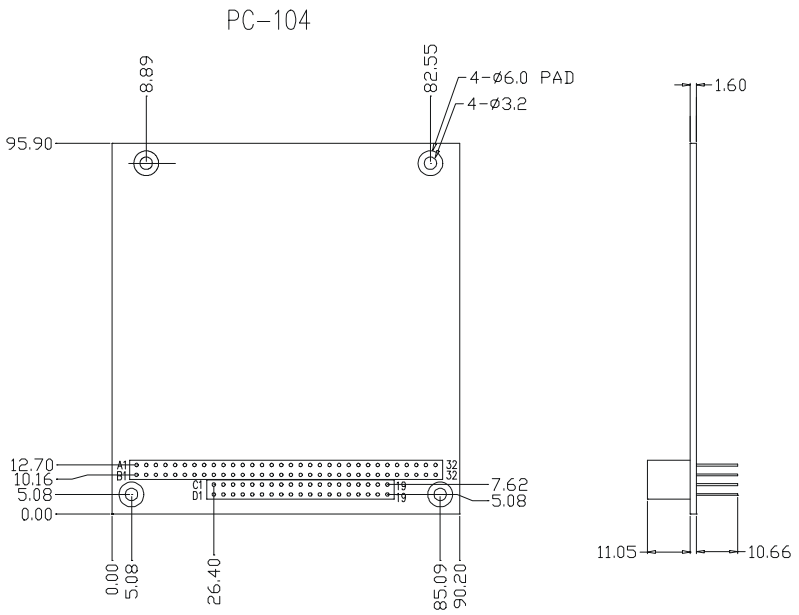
PC/104 module dimensions (mm) (± 0.1)
